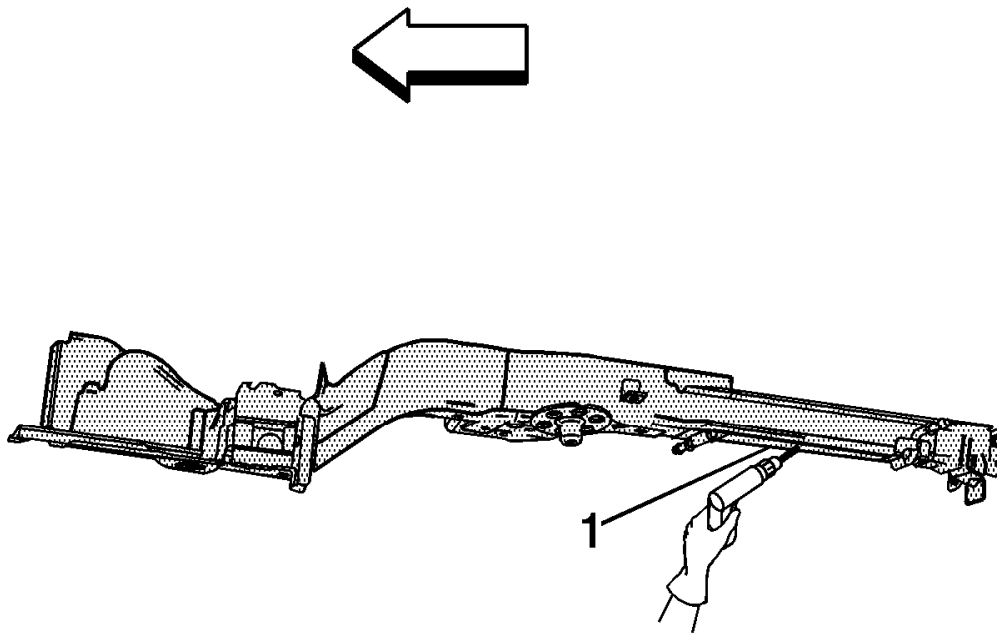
Drilling Plug Weld Holes In Replacement Underbody Rear Side Rail
